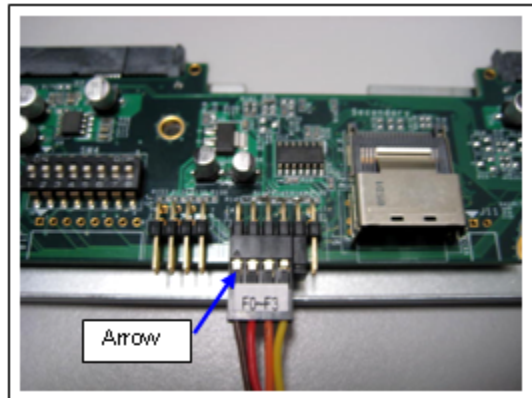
The 4-pin LED Cable Connection to the Backplane Board
